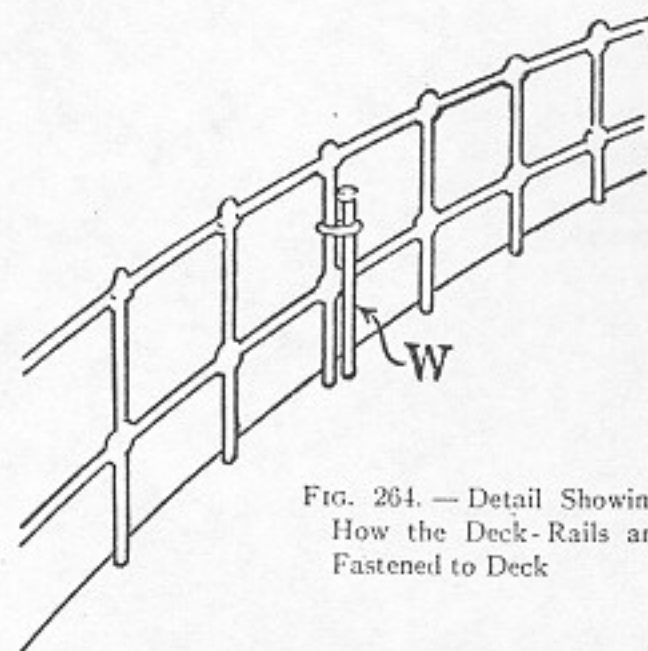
Detail Showing How the Deck-Rails are Fastened to Deck
